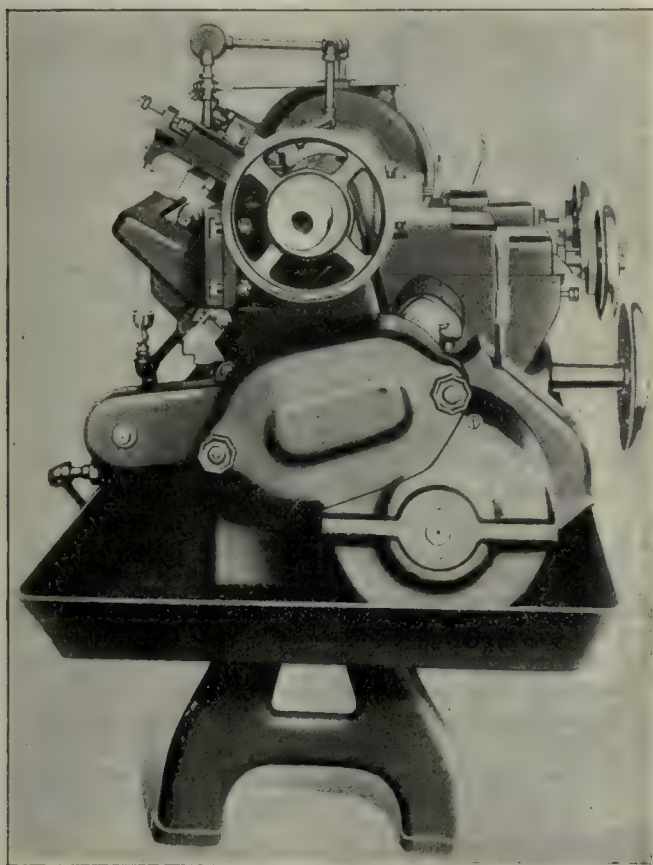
END VIEW OF THE LATHE SHOWING FEED-GEAR BOXES
